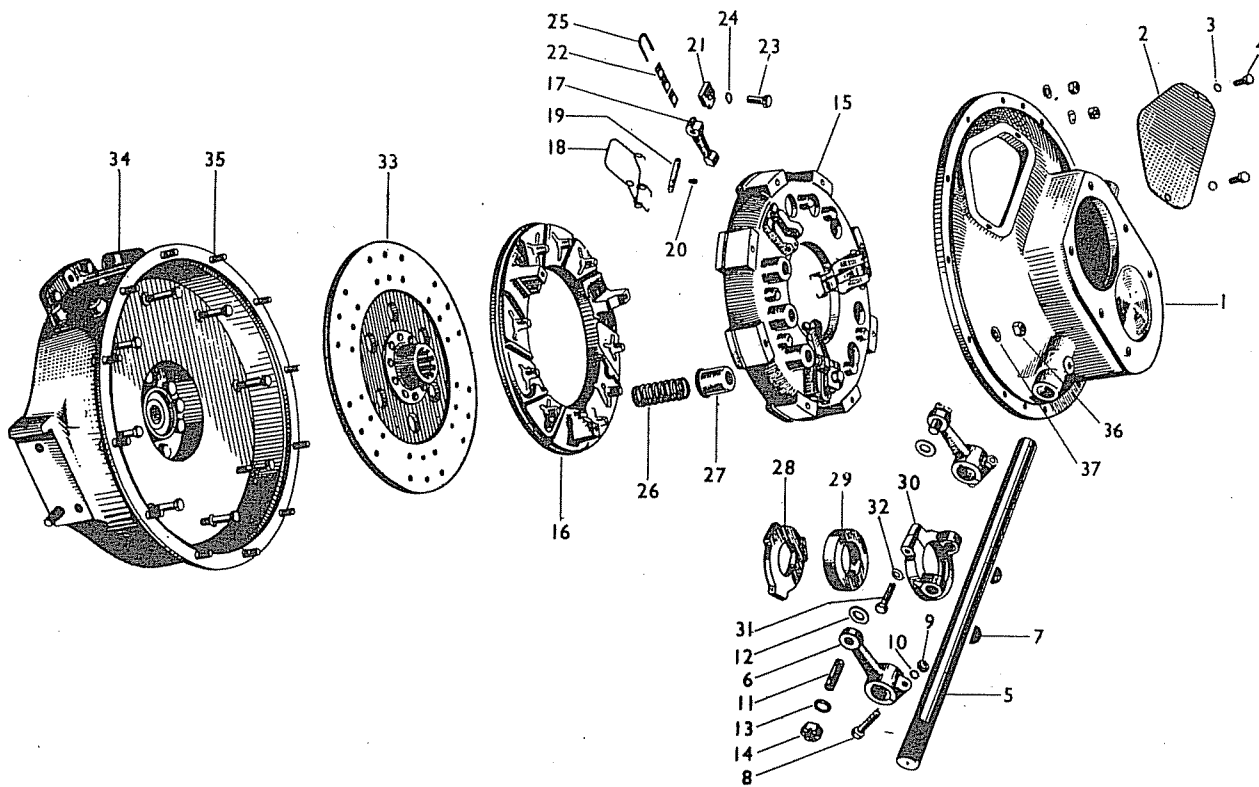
Typical View of Clutch, as fitted to 8-71 A-D.
